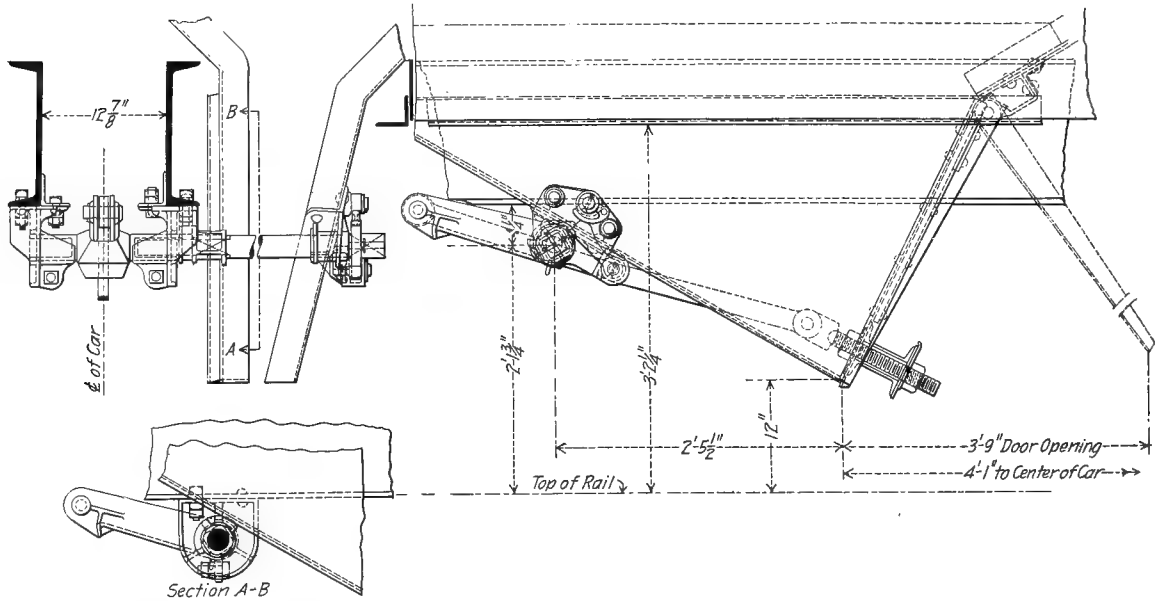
Door Operating Apparatus with Lind Safety Clutch for All-Steel Hopper Car. Pressed Steel Car Company.
